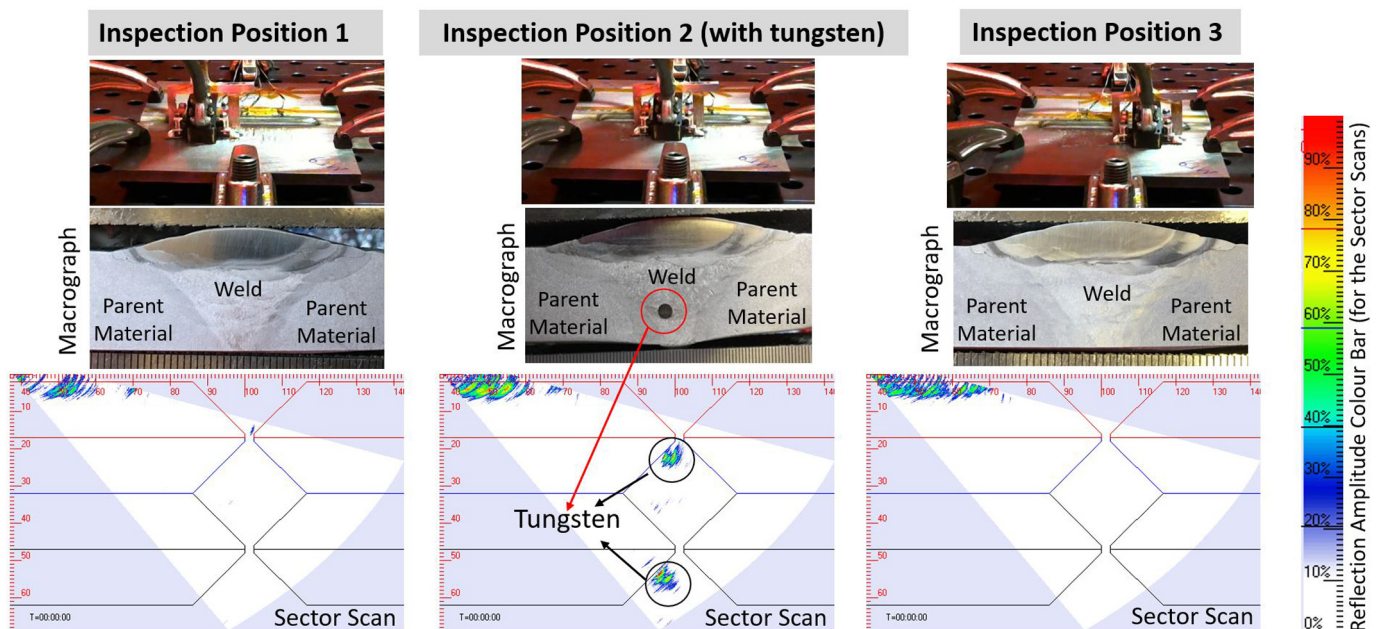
Detection of tungsten rod using the in-process inspection of the multi-pass weld (Sample #2).
